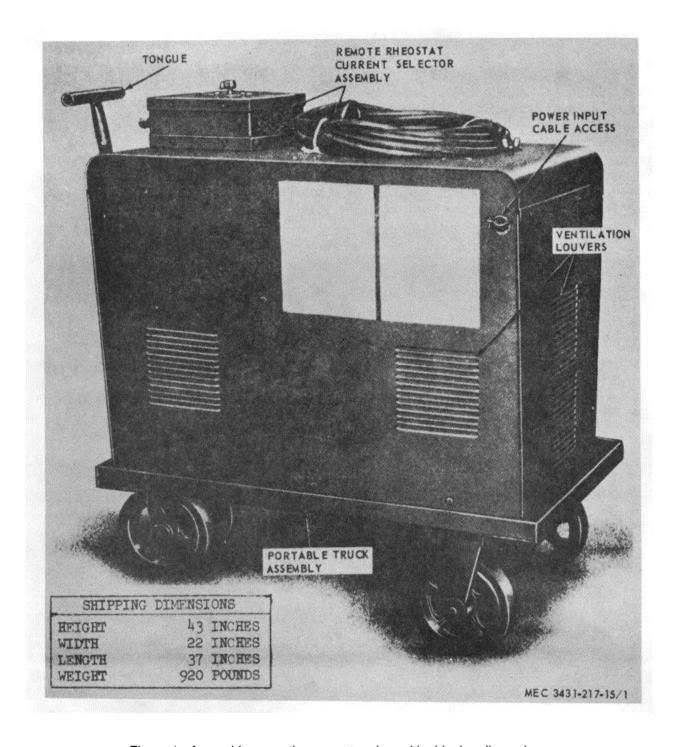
Arc welder rear, three-quarter view with shipping dimensions.
